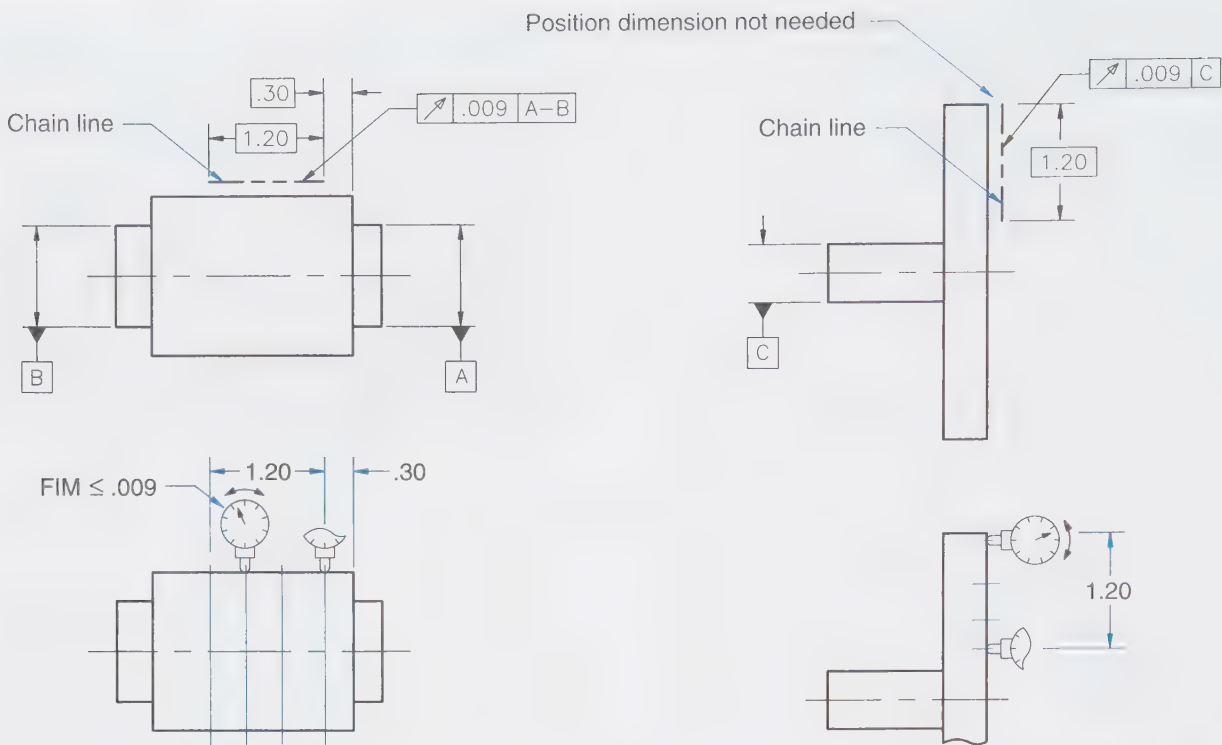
A limited zone of application for a runout tolerance is indicated by a heavy chain line.
